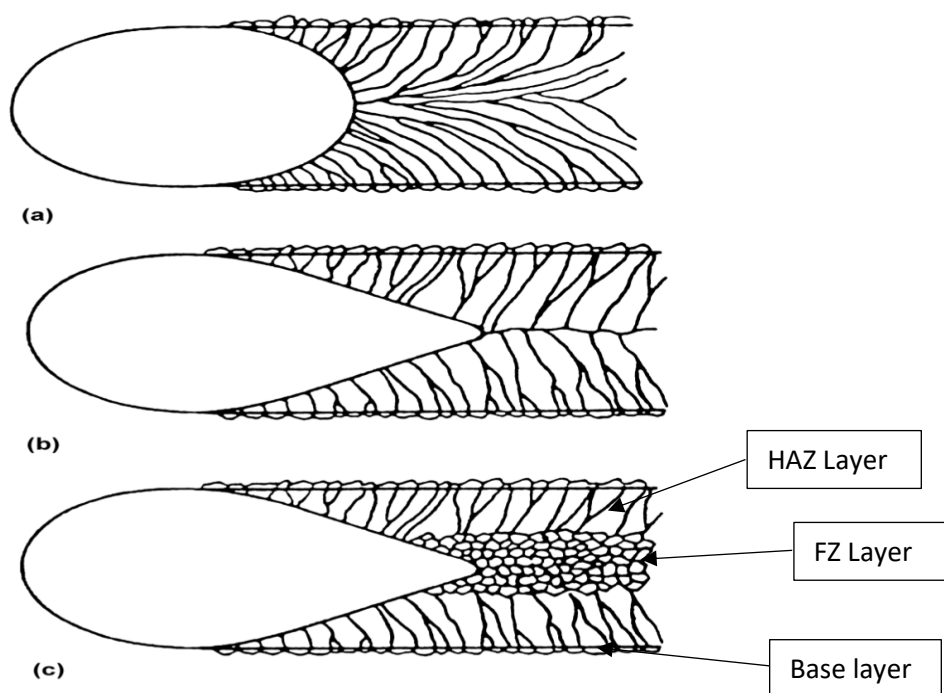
Different types of microstructure for fusion weld. (a) weld pool at low welding speed (b) weld pool shaped at high welding speed (c) weld pool shaped at higher welding speed [76].
